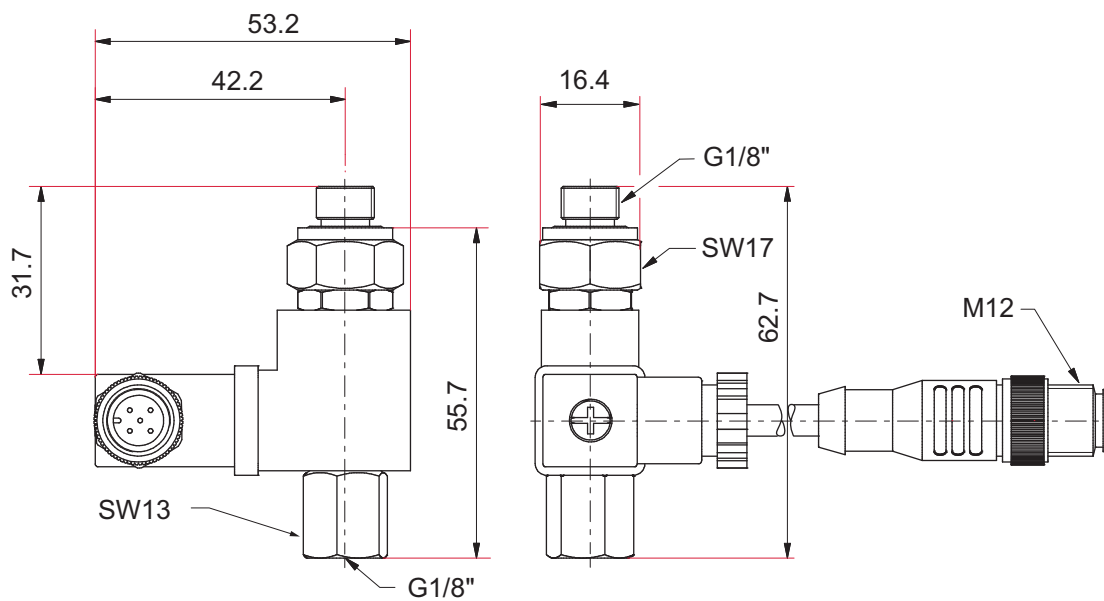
Dimensions of venting valve M12 with angled power supply plug
